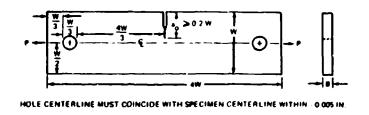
Single Edge Notch Tensile (SENT) Specimen.
